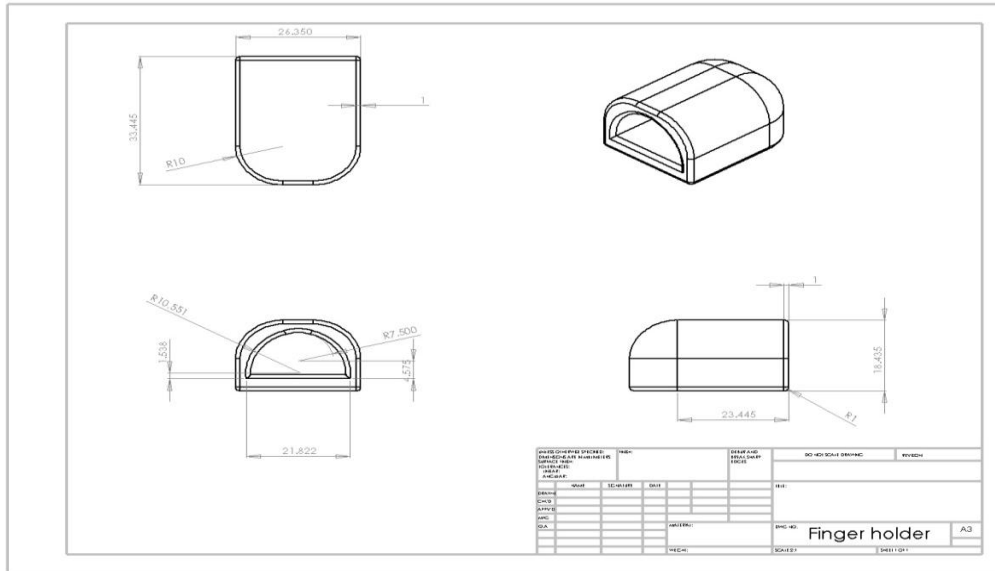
Dimensioned 2D drawing of the 3D SolidWorks® CAD model.
